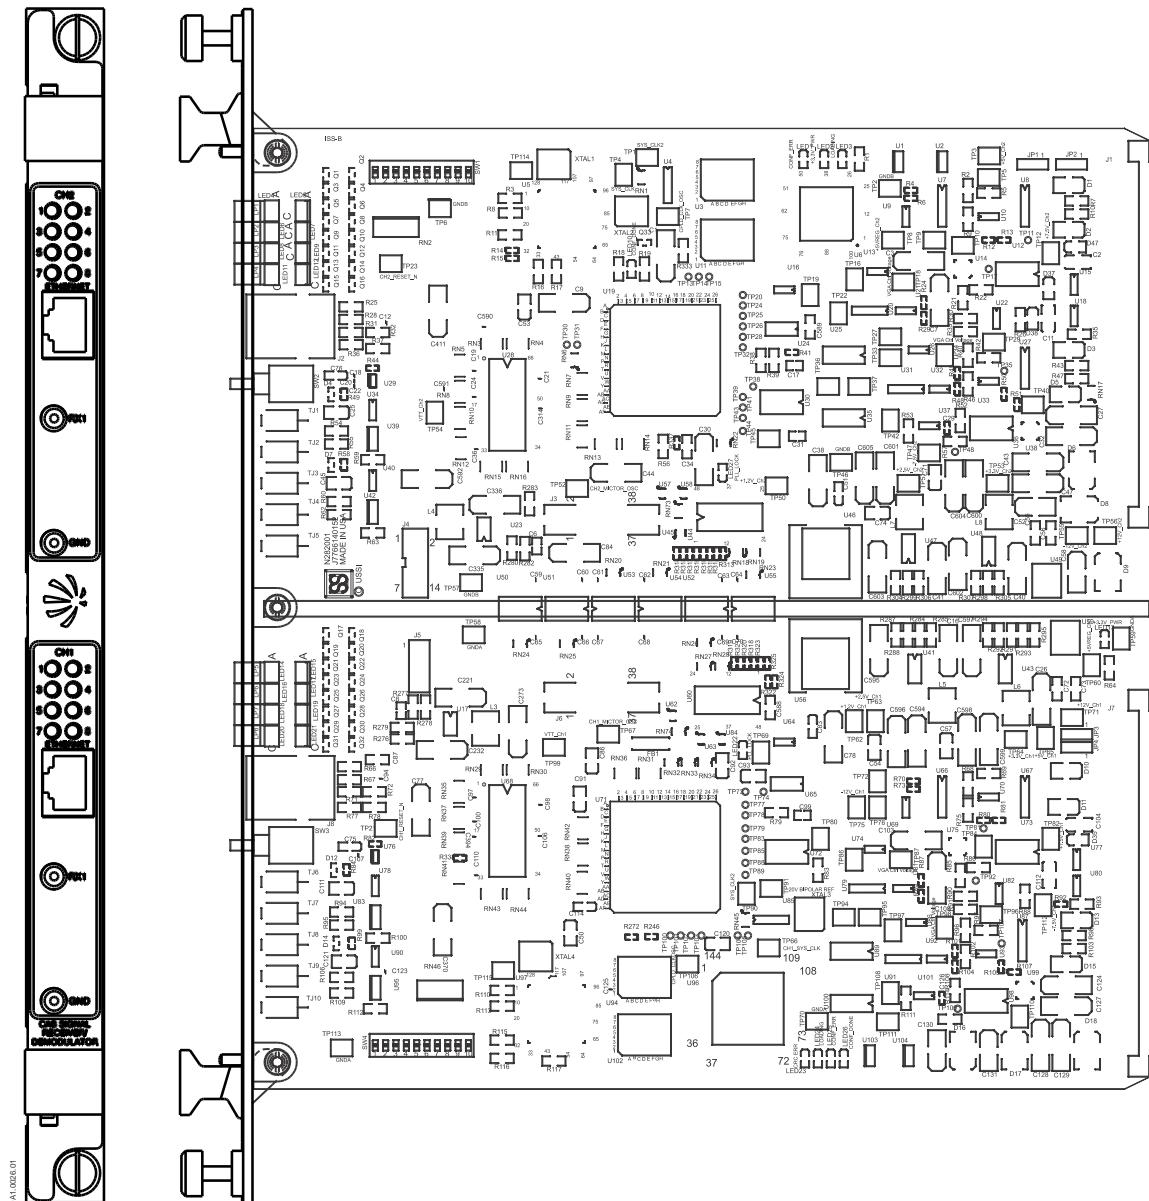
Cab Signal Receiver Demodulator PCB Assembly
